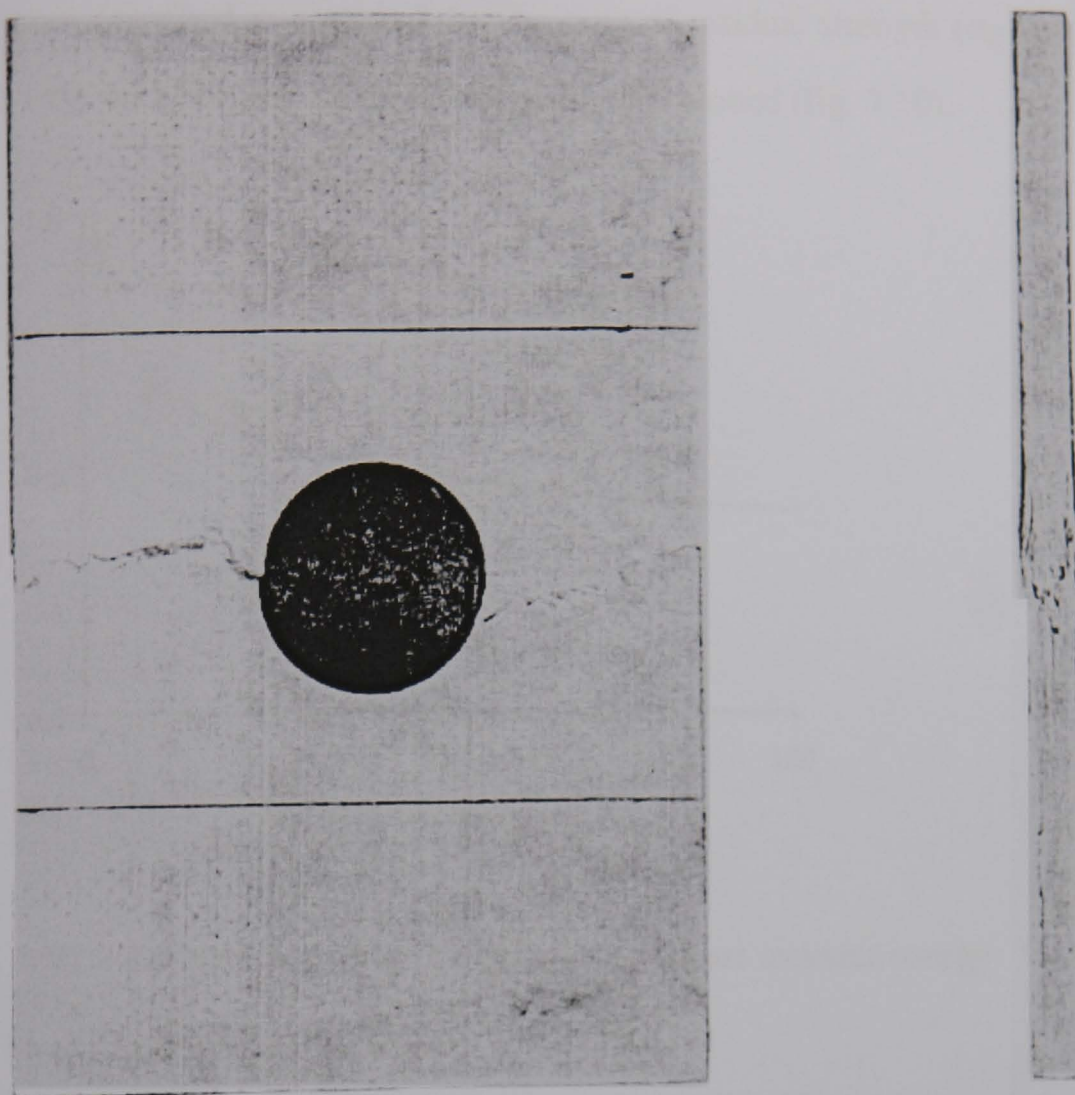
Typical fracture of tensile specimen with a 20 mm diameter drilled hole.
